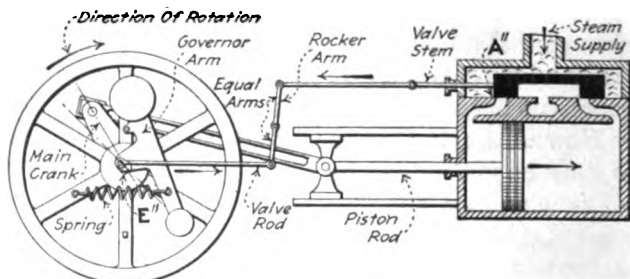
Method of governing with shaft governor and slide valve. (Steam cut off entirely.)
